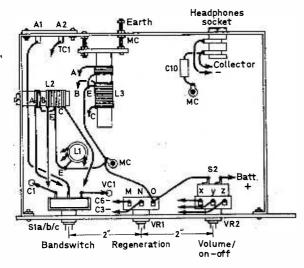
Bottom view of chassis and wiring of coils and controls.
